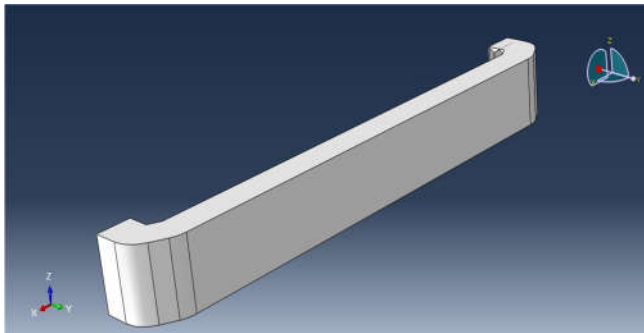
5. (a) Hexagonal honeycomb bumper for front and rear impact (front view)
